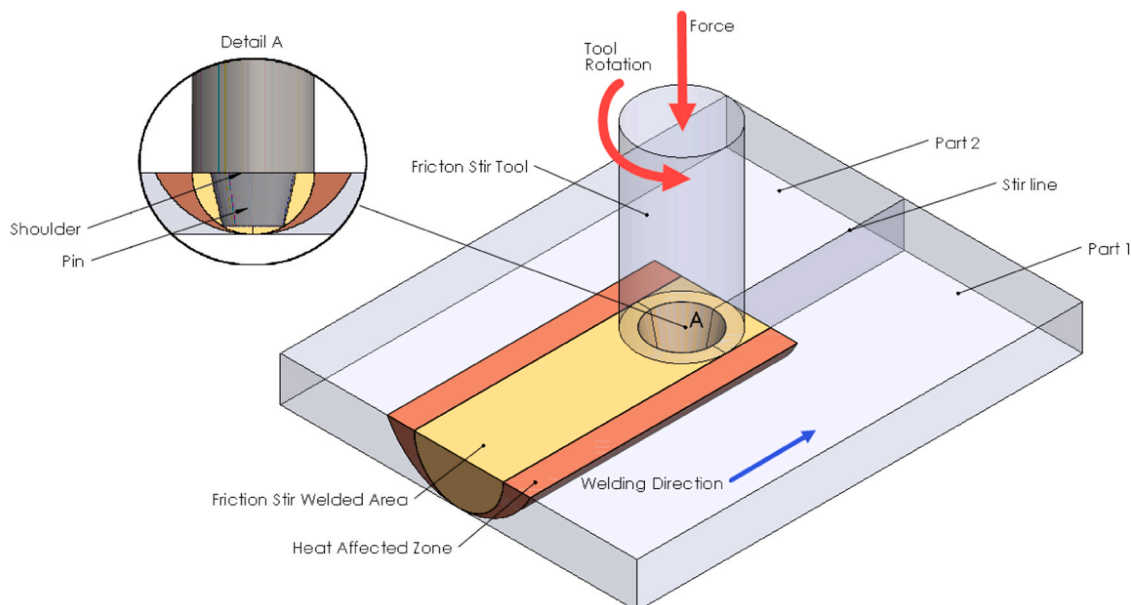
Schematic representation of friction stir welding (FSW).
